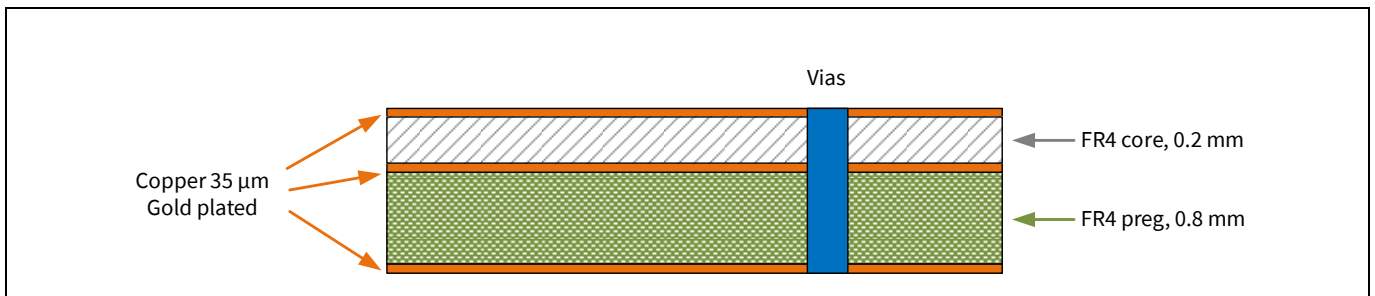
PCB stack information for the evaluation board with the PCB marking M11118
